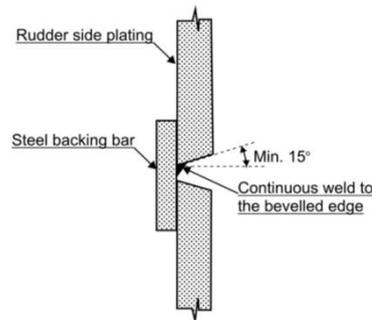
Use of steel backing bar in way of full penetration welding of rudder side plating
